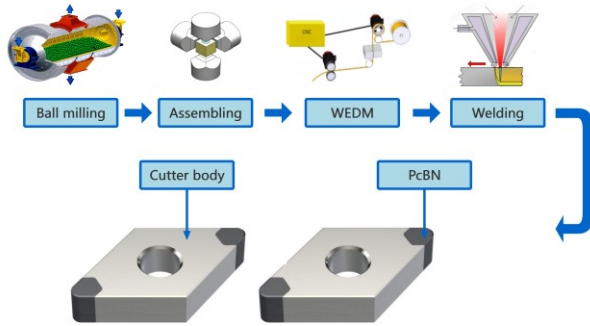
Physical image of assembling PcBN after WEDM and welding onto the cutter body
